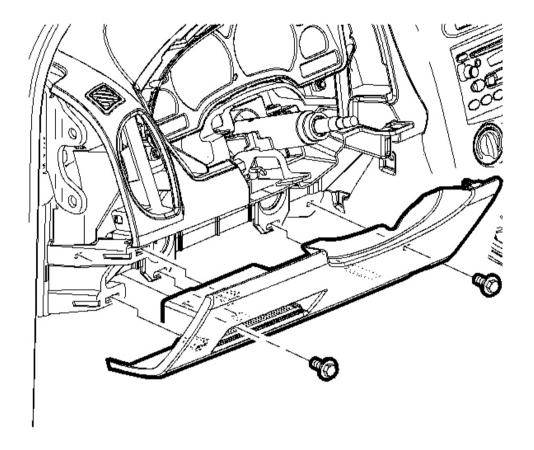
Knee Bolster & Bolts Courtesy of GENERAL MOTORS CORP.
